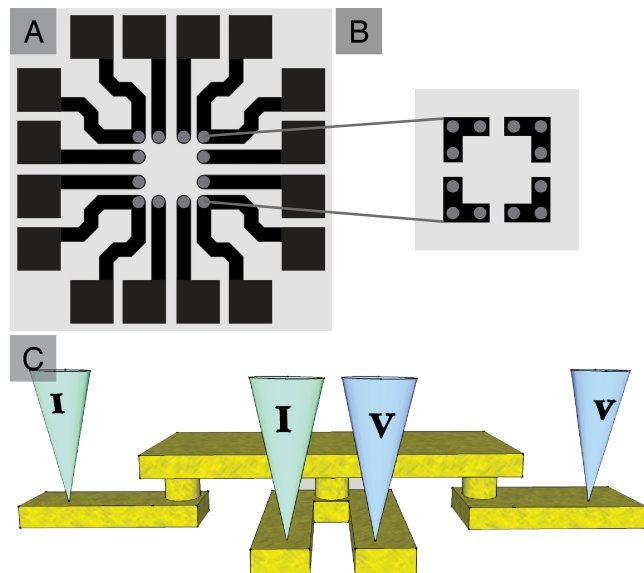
Drawing of A) Test vehicle substrate. B) Test vehicle die. C) Electrical measurement setup.
